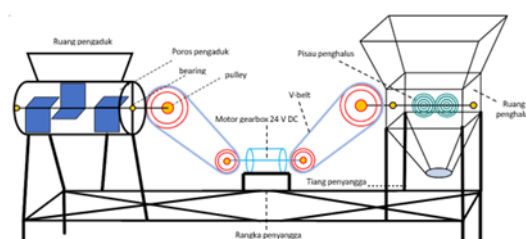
Parts of Fertilizer Mixer and Smoother Enclosure using 24 V DC Motor
